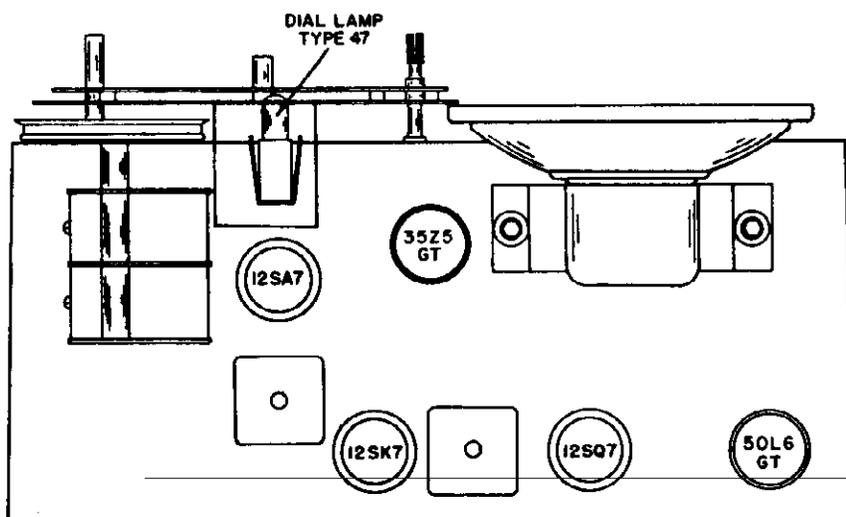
Top View of Chassis Showing Location of Tubes and Dial Lamp
